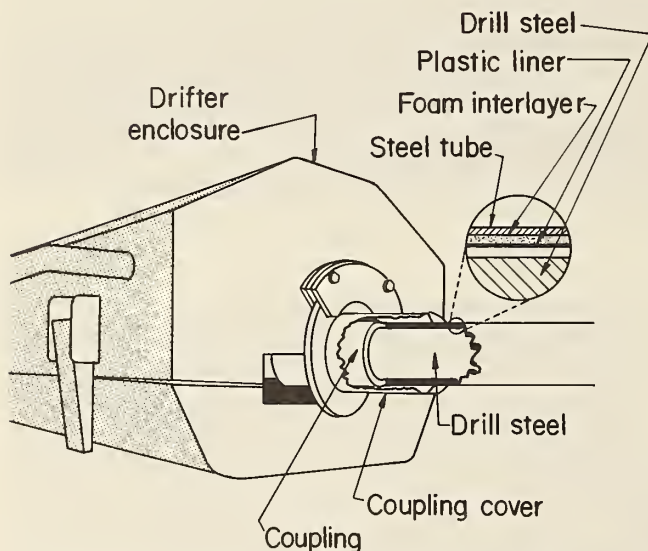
Retrofit shroud tube for controlling jumbo drill-steel noise.
